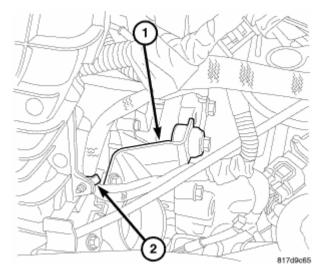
Throttle Body Support Bracket Courtesy of CHRYSLER LLC
